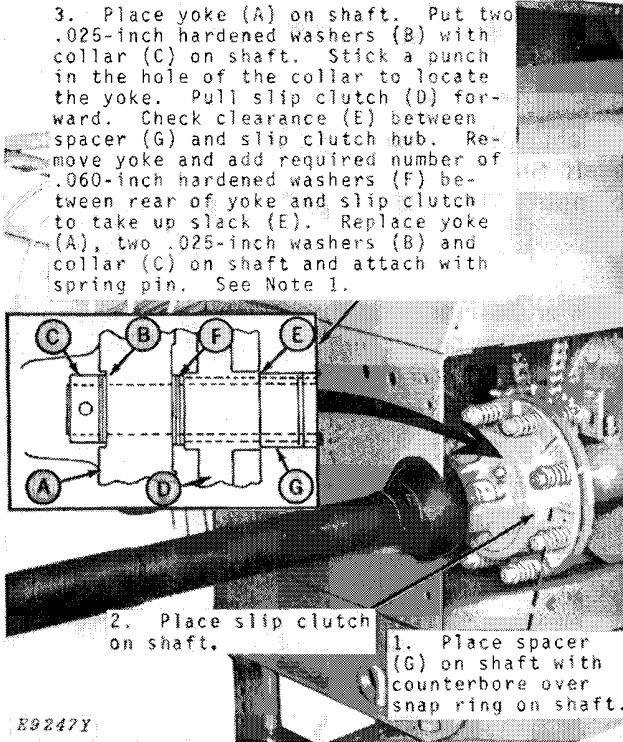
Installing Overrunning Clutch and Slip Clutch on Input Shaft
